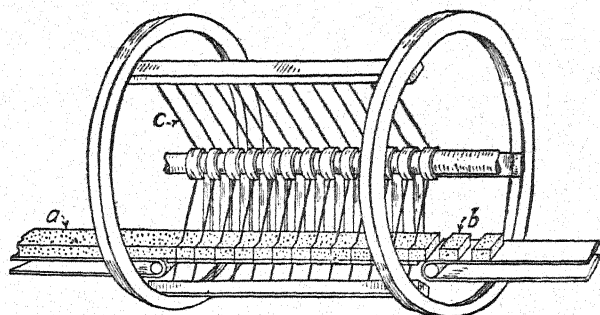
Side wire automatic brick-cutting machine. *a.* Clay. *b.* Bricks. *c.* Wires.
